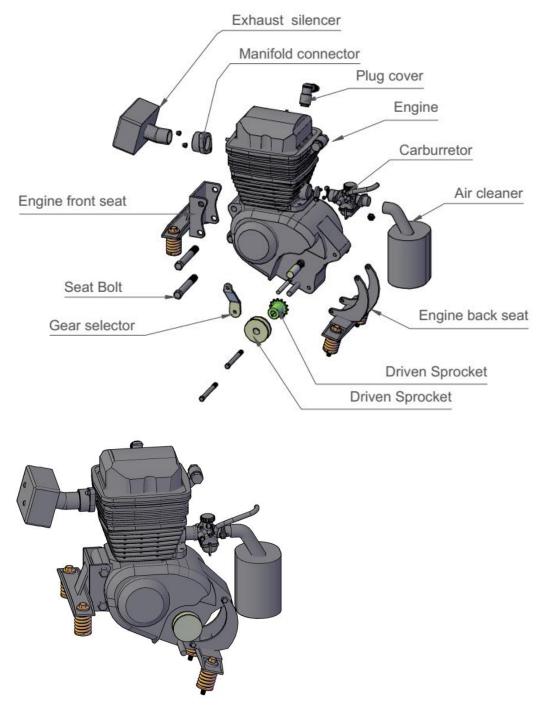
11: The Engine and its Attachments (a) Exploded View (b) Assembly view
